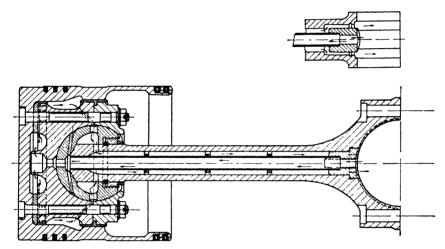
Piston and connecting-rod with spherical bearing
